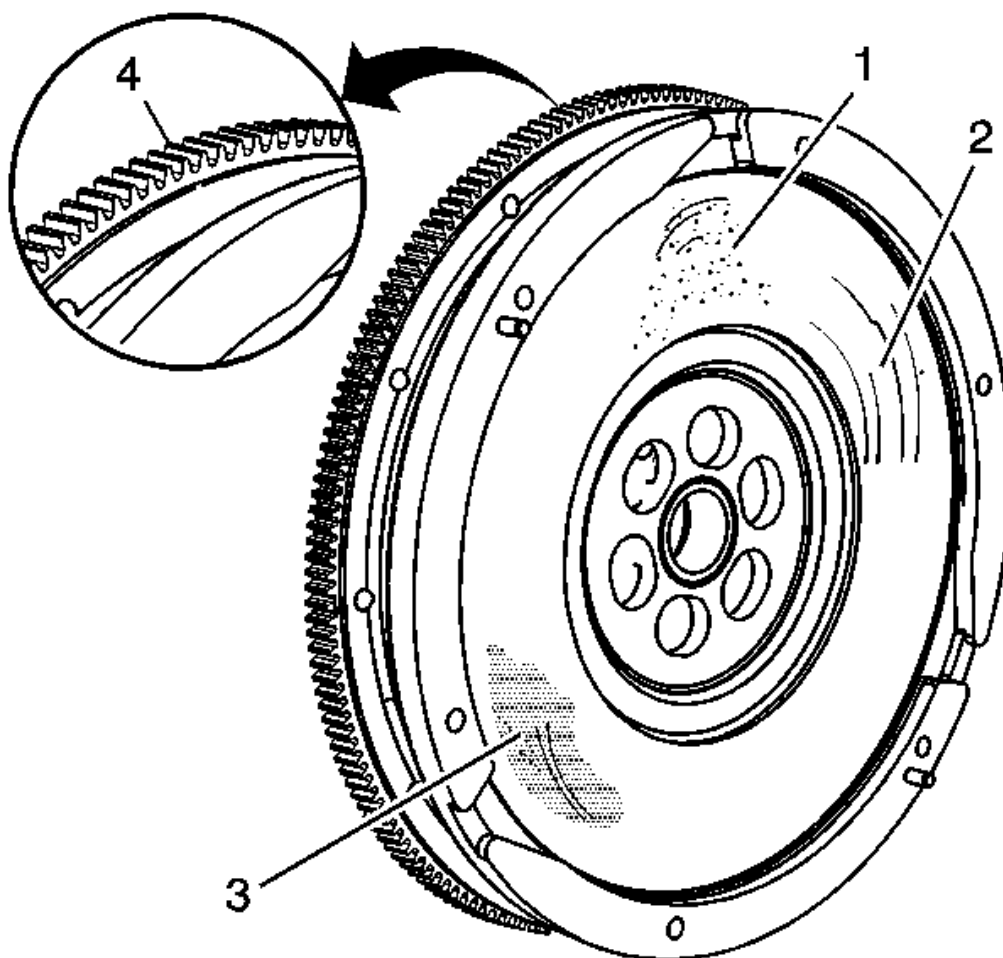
Identifying Manual Transmission Flywheel Wear & Damage
